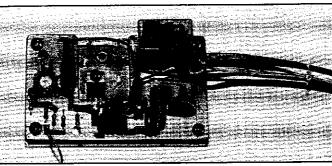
Transmitter board and heat sink assembly. Q14 and Q15 circuitry is on this "U"-shaped double-sided board, as are the low-pass filter components and the changeover relay, RY1 The heat sink is 1/4 inch thick aluminum measuring 33/4 inches wide by 21/4 inches high It is tapped on the edge for bolting to the main board. A second, smaller (1 inch by 11/8 inch) aluminum plate is bolted to the first, and the board is spaced away from the heat sink so the Q15 tab can be bolted to the aluminum. mounting Q15
